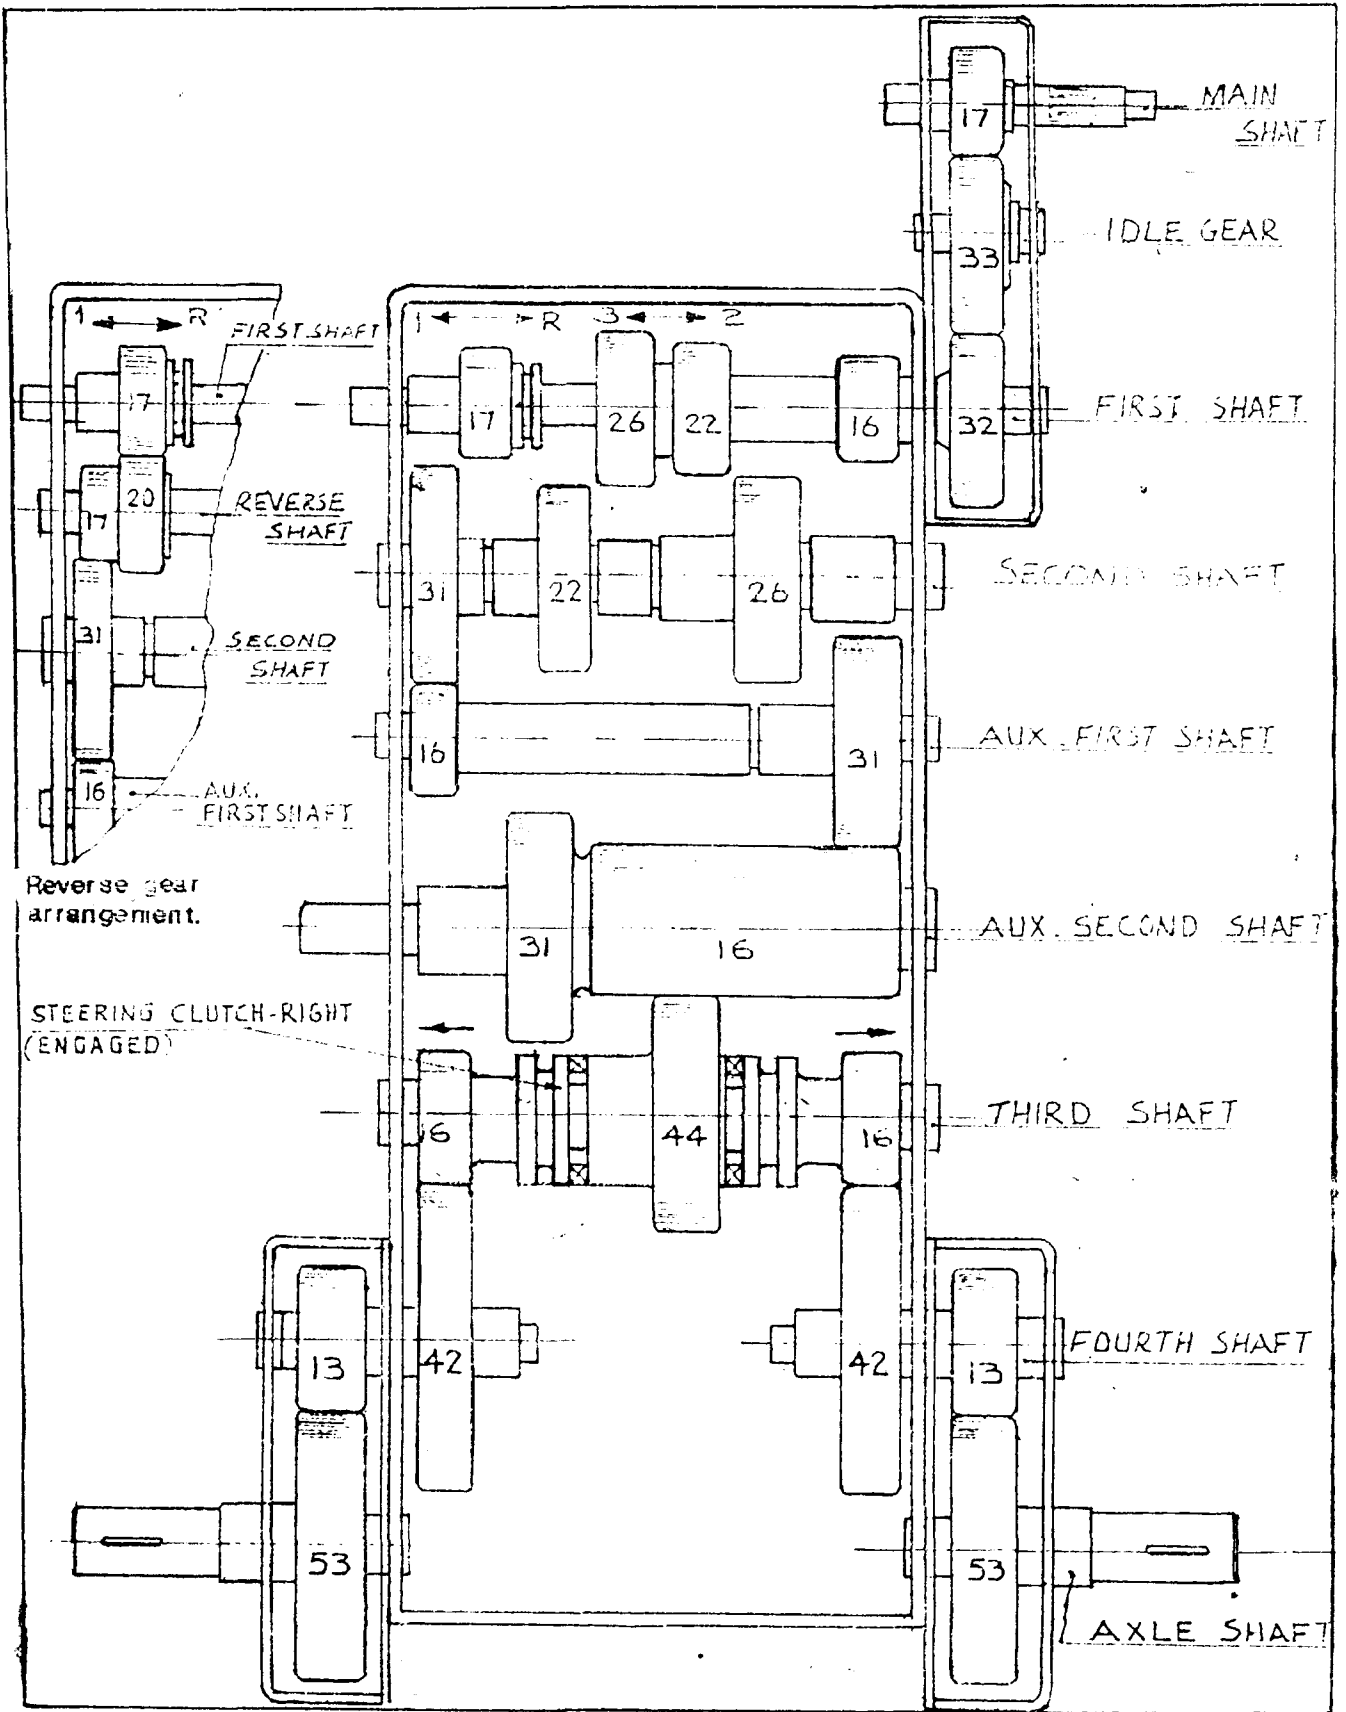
Speed reduction mode from main clutch shaft to wheel axle of KAMCO power tiller.
